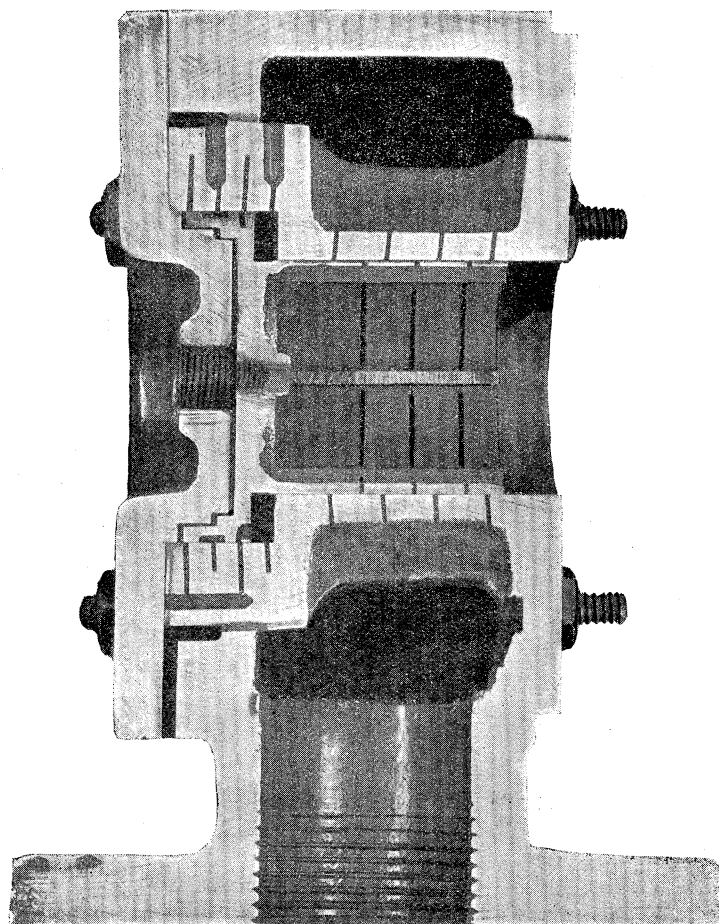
Small model of the diaphone sectioned to show details of construction.
